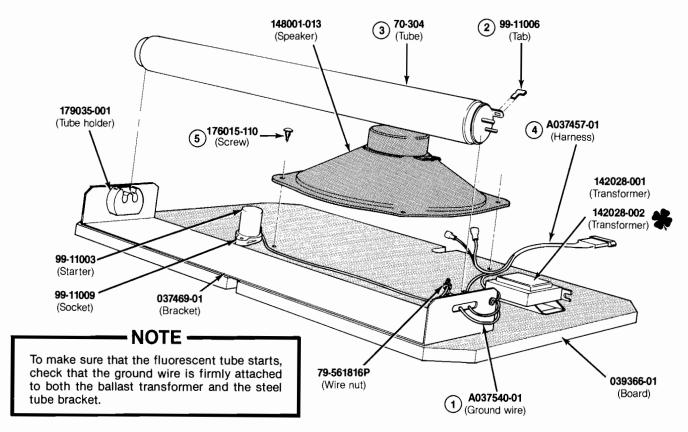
Fluorescent Tube and Speaker Board Assembly U.S.-Built Upright Cabinet A039415-01 A Ireland-Built Upright Cabinet A039415-02 A Parts List
